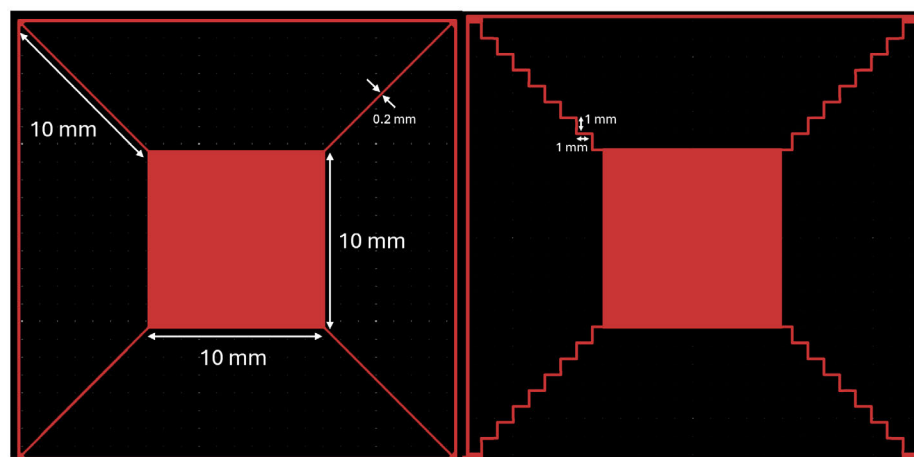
Fixed (left) and serpentine (right) spring-suspended electrode designs.
